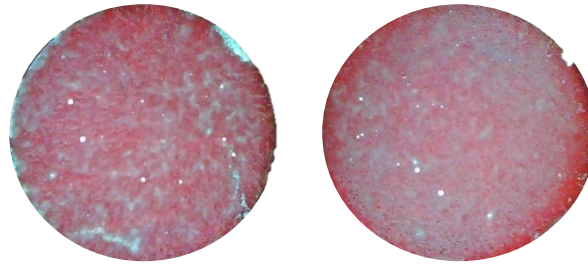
Fracture surfaces of non-singular specimens.
